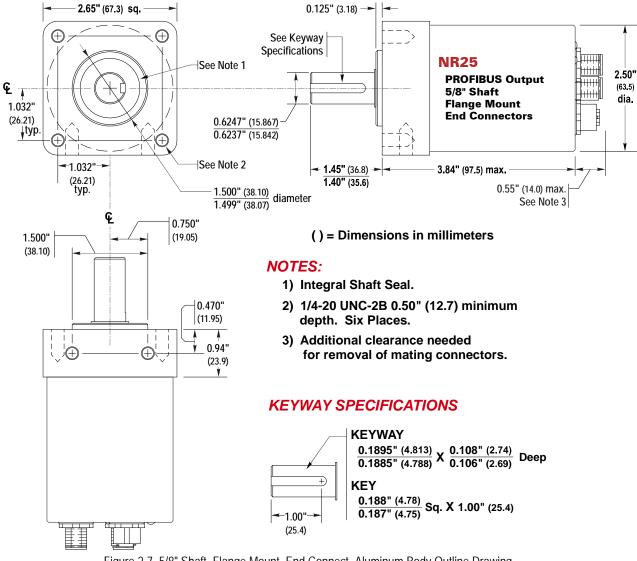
5/8" Shaft, Flange Mount, End Connect, Aluminum Body Outline Drawing
